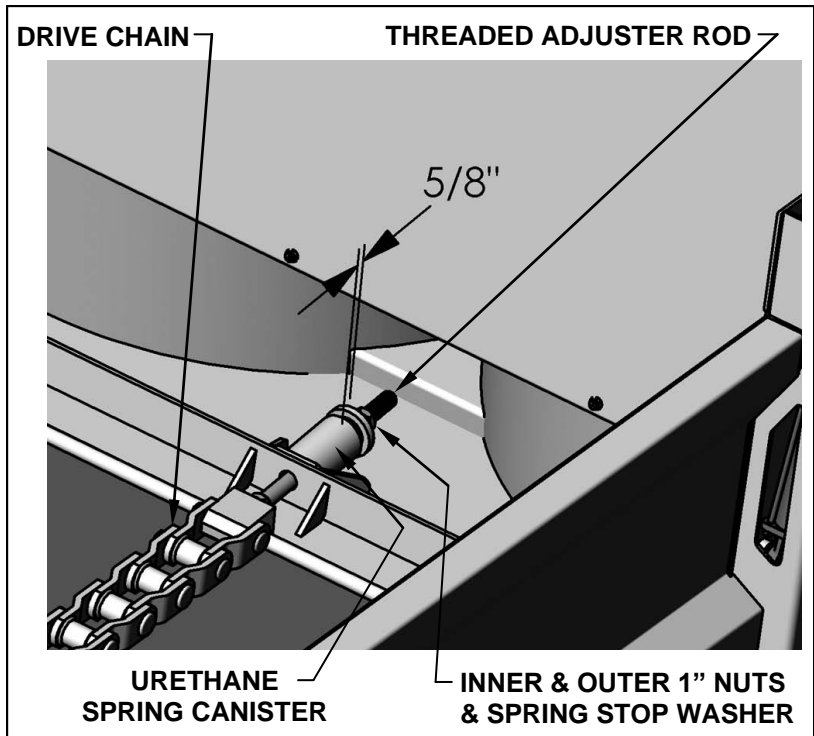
URETHANE SPRING CHAIN ADJUSTER
